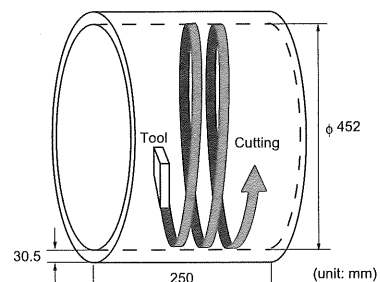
Geometry of pipe test specimen and configuration of surface machining for pipe test specimen.
